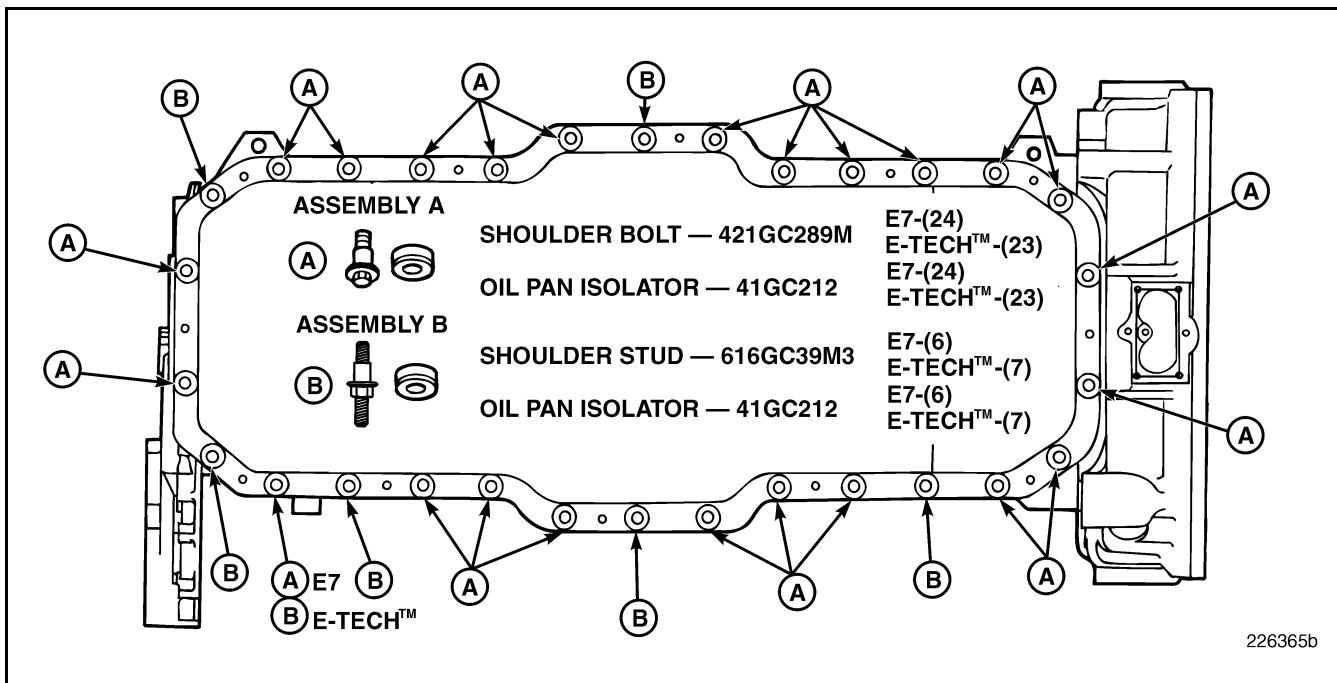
Isolating Oil Pan Hex-Head Shoulder Bolt (A) and Shoulder Stud (B) Locations
